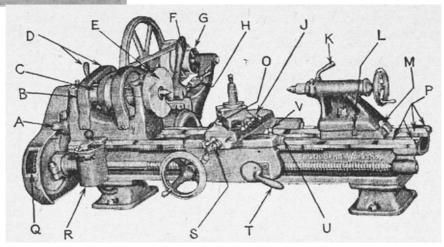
"South Bend" Lathe. A, reverse lever; B, ball thrust bearing; C, 3-step cone pulley; D, back gears; E, face plate; F, belt tension release lever; 6, countershaft; H, belt tension adjustment; J, micrometer collar; K, tailstock spindle lock; L, tailstock set-over; M, witness mark for aligning tailstock; N, micrometer collar; 0, compound rest graduated 180°; P. V-ways and flat-way on bed; Q, index plate; R, reversing switch; S, felt wipers; T, half-nut lever; V, carriage lock. (R. Melhuish, Ltd., London)
